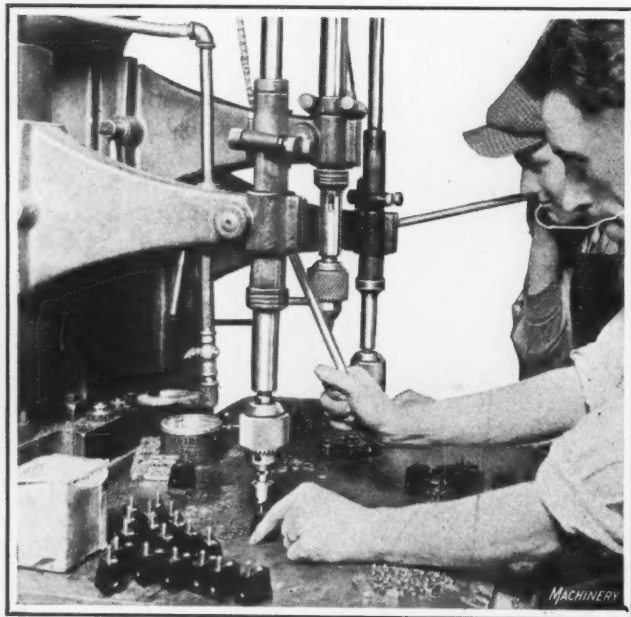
Two Spindles of a Three-spindle Drilling Machine used for Spinning Operations
